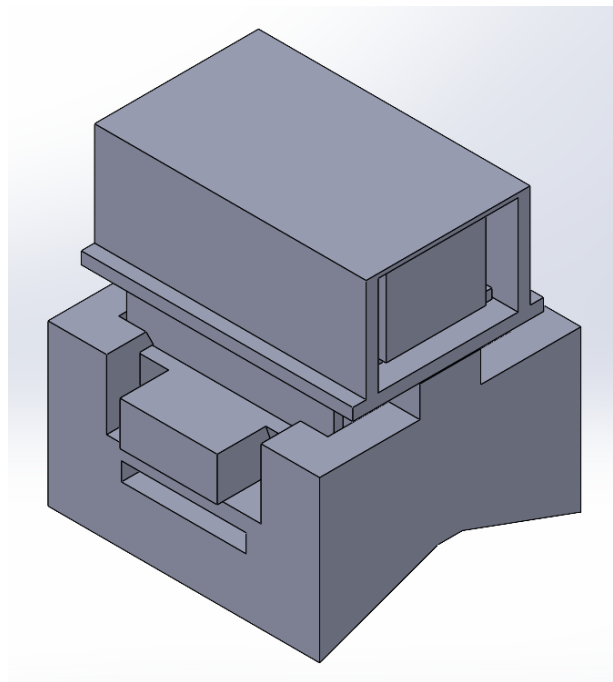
Assembly model of the sensor, housing, and platform fitting together
